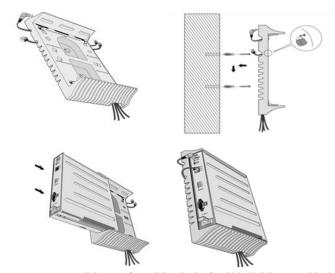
Mounting Module in Wall Mount Holder
